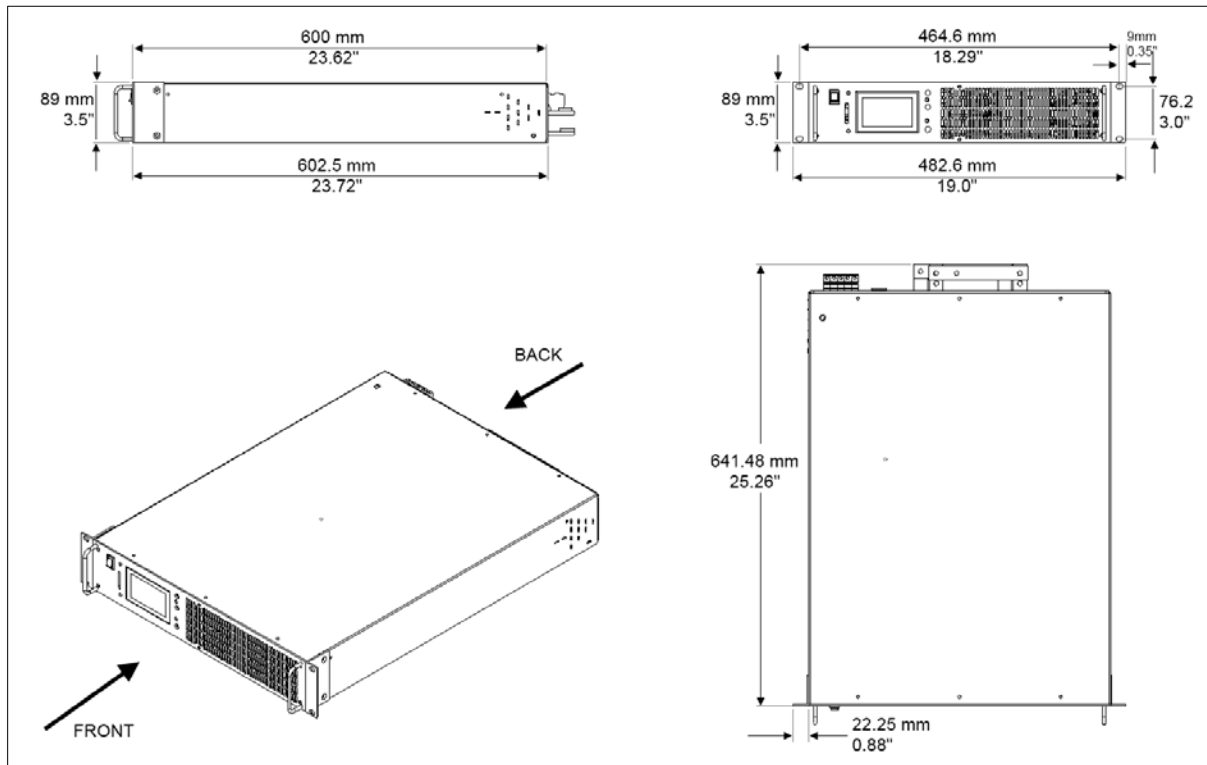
Dimension Drawing DDP 6KW - 10KW Models
